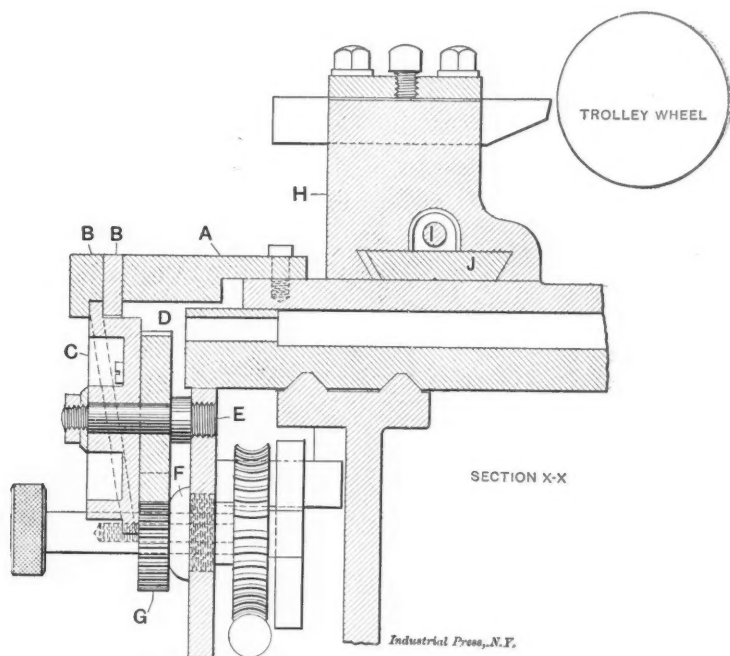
Cross-section of Lathe Carriage and Cam Attachment.
